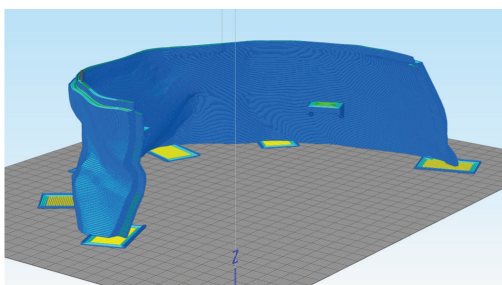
Sliced Part Featuring Rectangular Pads, Mounting and Lip
